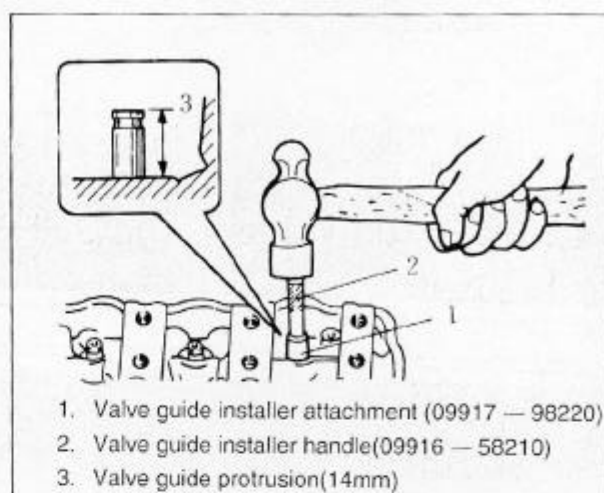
A — 66 INSTALLATION OF VALVE GUIDE
